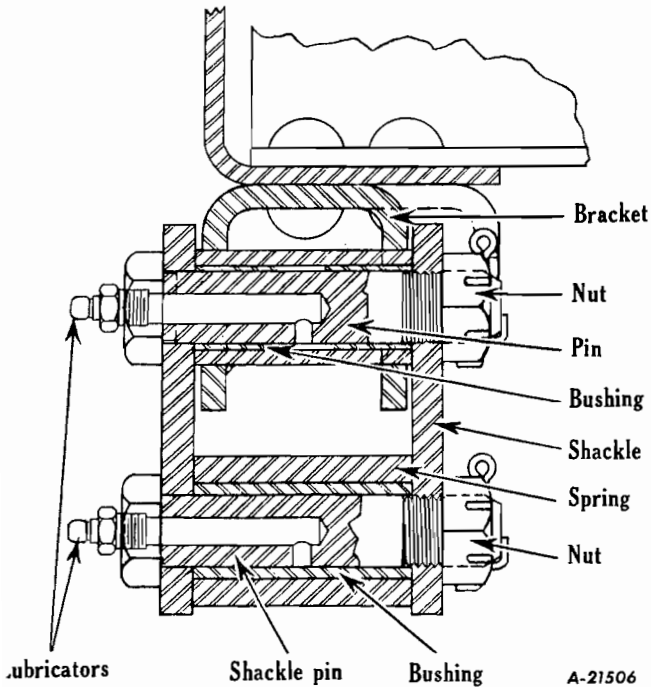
Front Spring Rear Shackle For Models L-150, L-153, L-160, L-163, L-164, L-165, LC-160, L-170, L-173, L-174, L-175, LF-170, L-180, L-183, L-184, L-185, LC-180.
